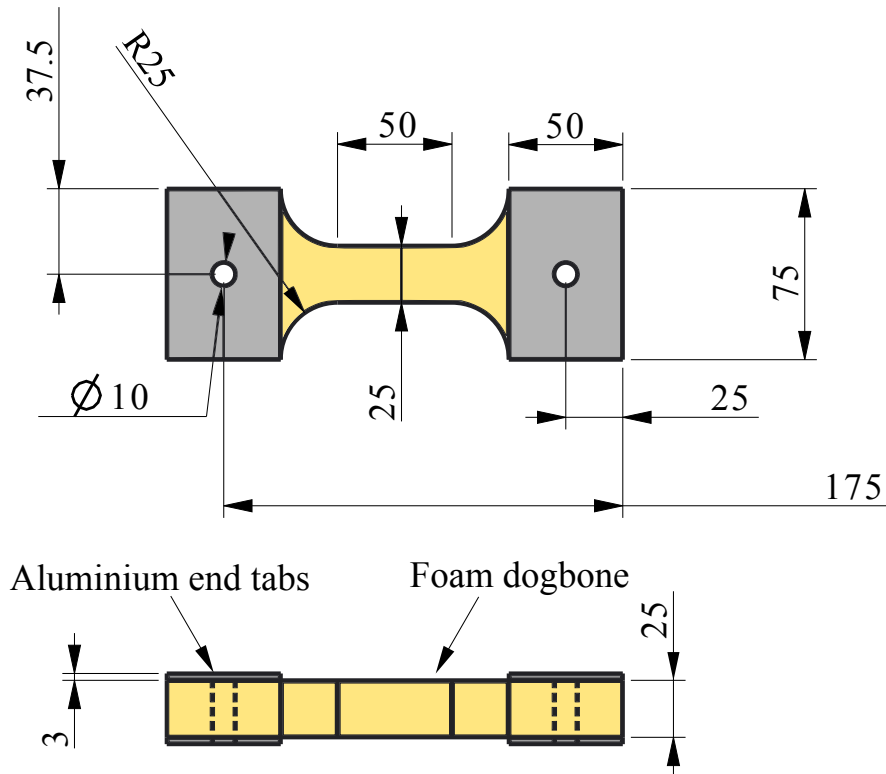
Tensile dogbone specimen (all dimensions in millimetres)
